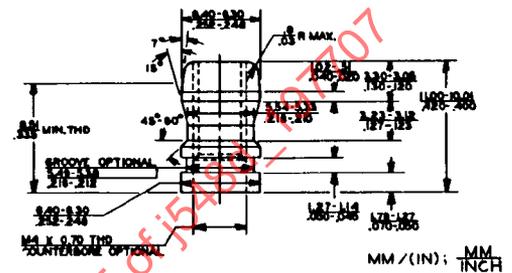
NUT TYPE FOR THREADED POST (SEE TABLE 6)
